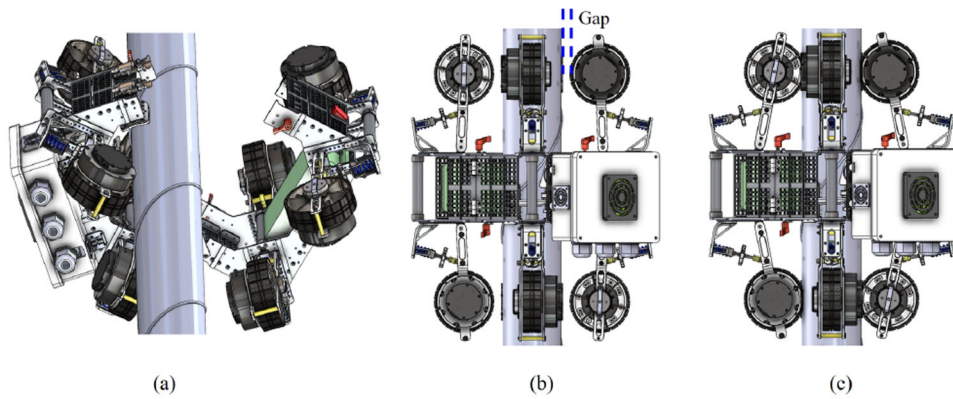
| Installation steps for the cable climbing platform, which is the shared component of the cable maintenance robot and cable rescue robot. (a) Keeping the climbing platform open. (b) Keeping the driving wheel spread out. (c) Clamping the driving wheel on the stay cable. [Color figure can be viewed at wileyonlinelibrary.com]
